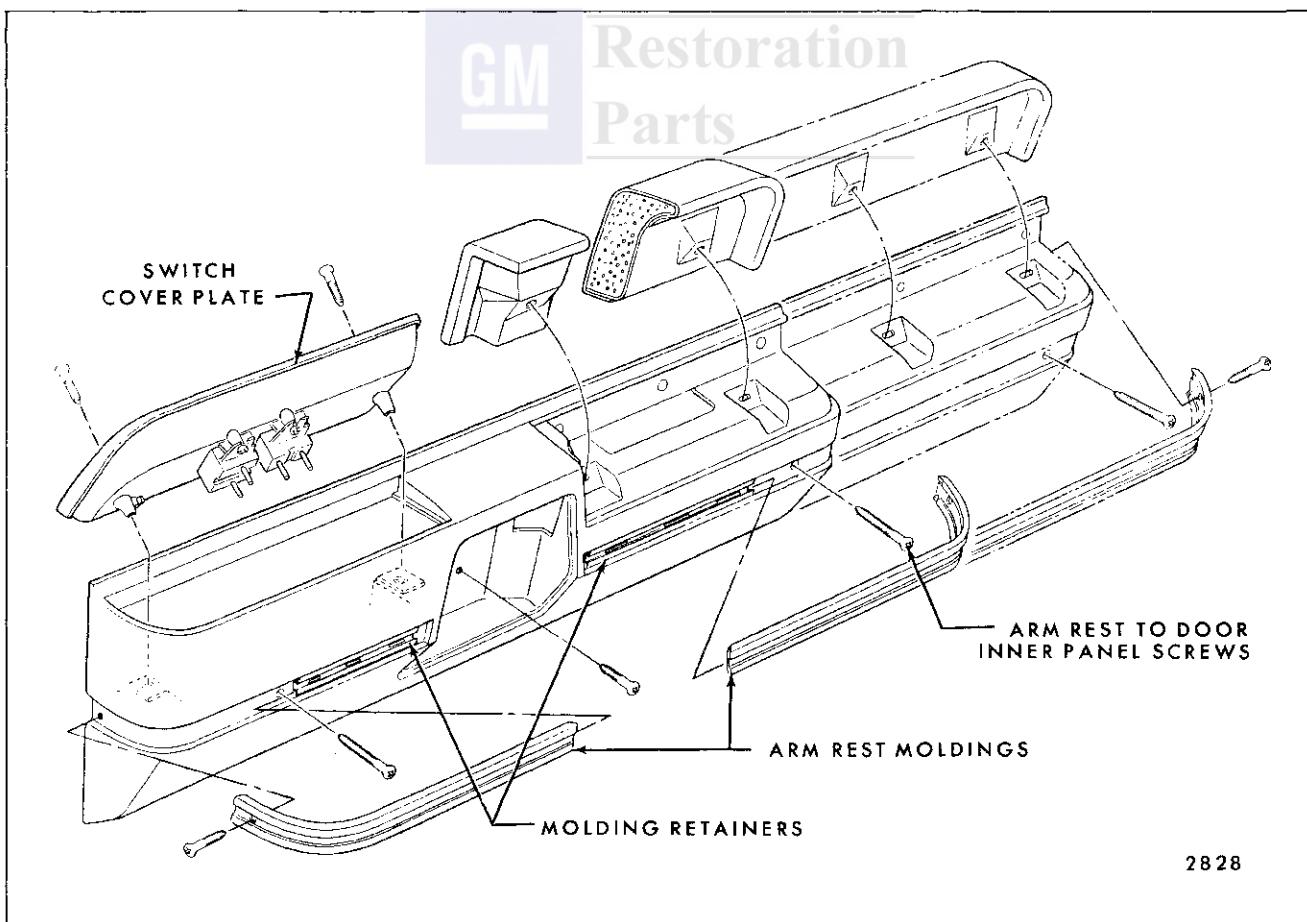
Door Trim Pad Removal — Oldsmobile - Buick "C" Styles
